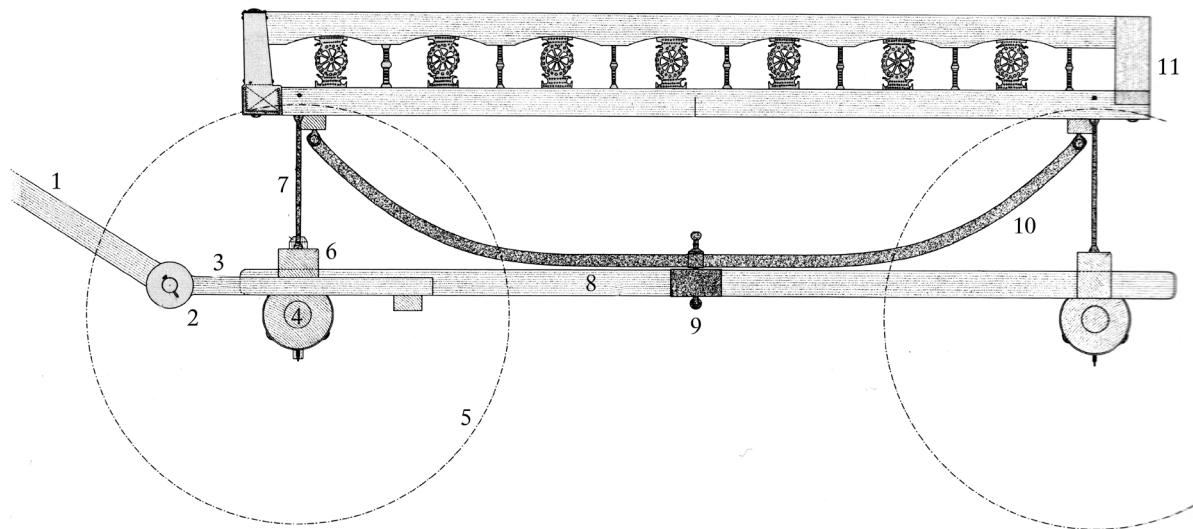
Terminology of wagon with wagon body. 1 – drawbar; 2 – drawbar joint; 3 – joint; 4 – axle arm; 5 – wheel; 6 – support handle; 7 – beam/axle pin; 8 – perch; 9 – kingpin; 10 – wagon body suspension; 11 – wagon body/box (after: *Barth et al. 1987, Taf. 71*).
